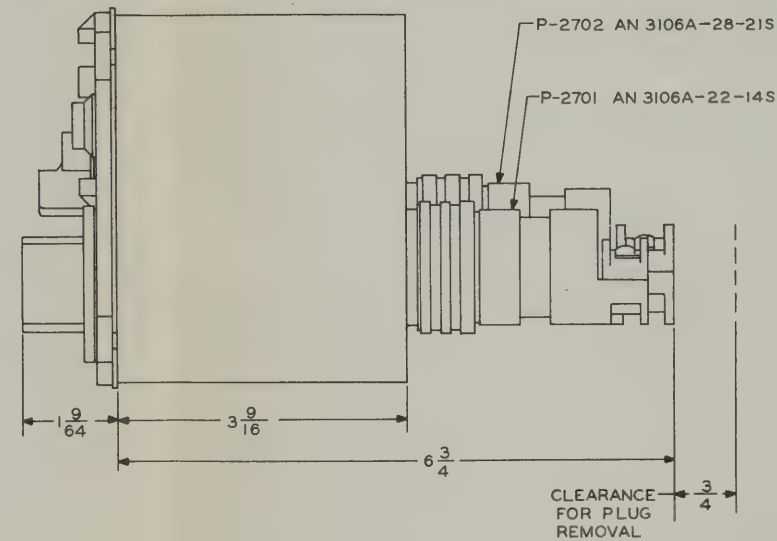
E. Radio Set Control C-906/ARC-27, Outline and Mounting Dimensions
